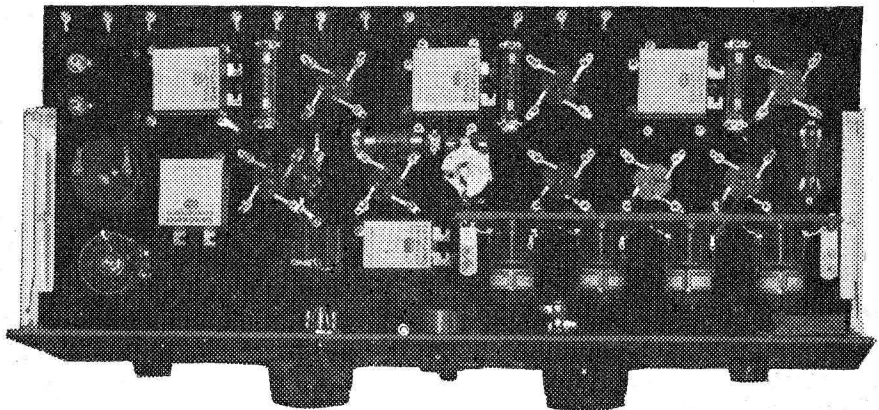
Bottom of Sub Base, Showing Special Mounting of St. James Transformers
